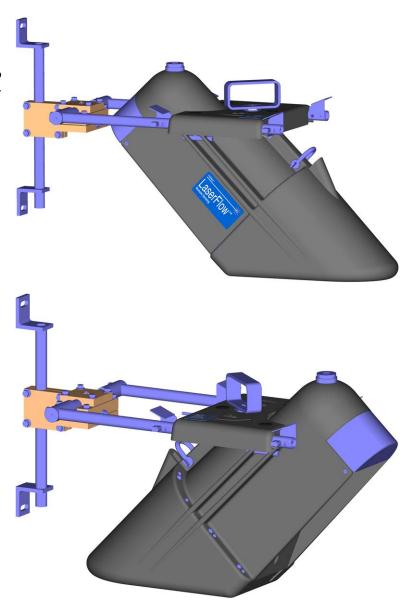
Wall Mount: Sensor carrier installed on tube coupler
